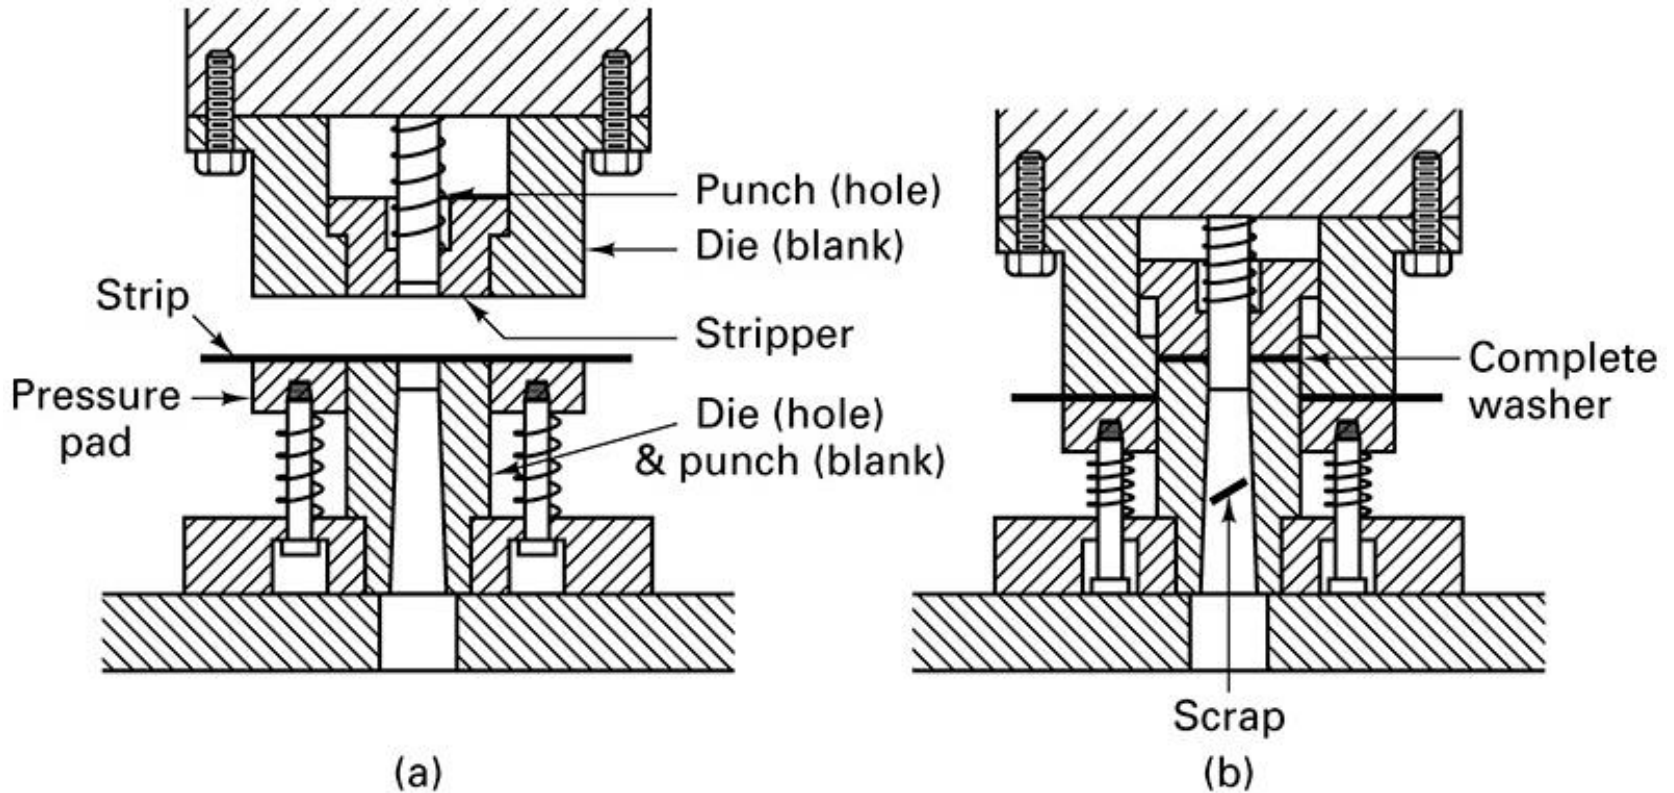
Method for making a simple washer in a compound piercing and blanking die. Part is blanked (a) and subsequently pierced (b) in the same stroke. The blanking punch contains the die for piercing.
